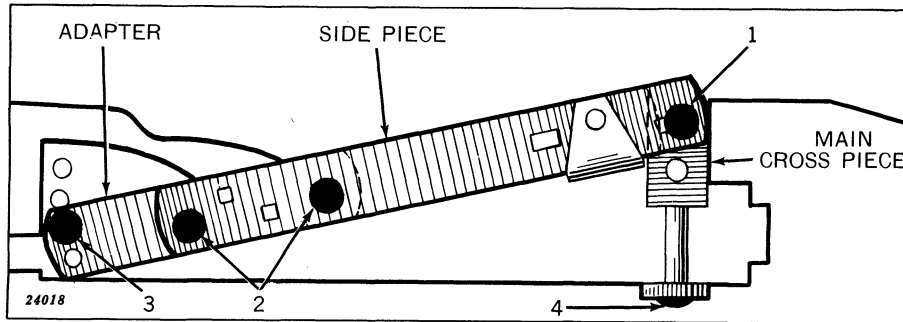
Draft Link Bracket Installed on Model "A" Tractors Below Serial No. 561902
